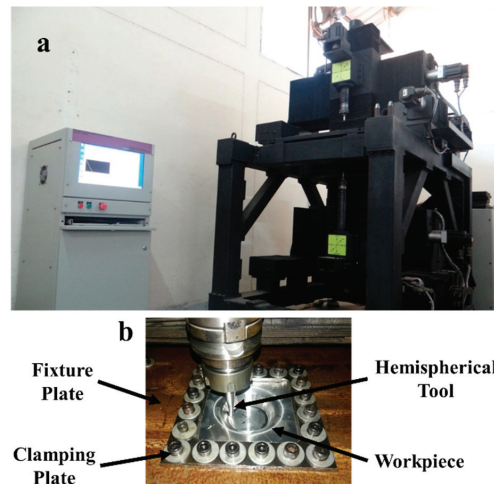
Experimental setup consisting of (a) dieless manufacturing center (b) forming setup.
